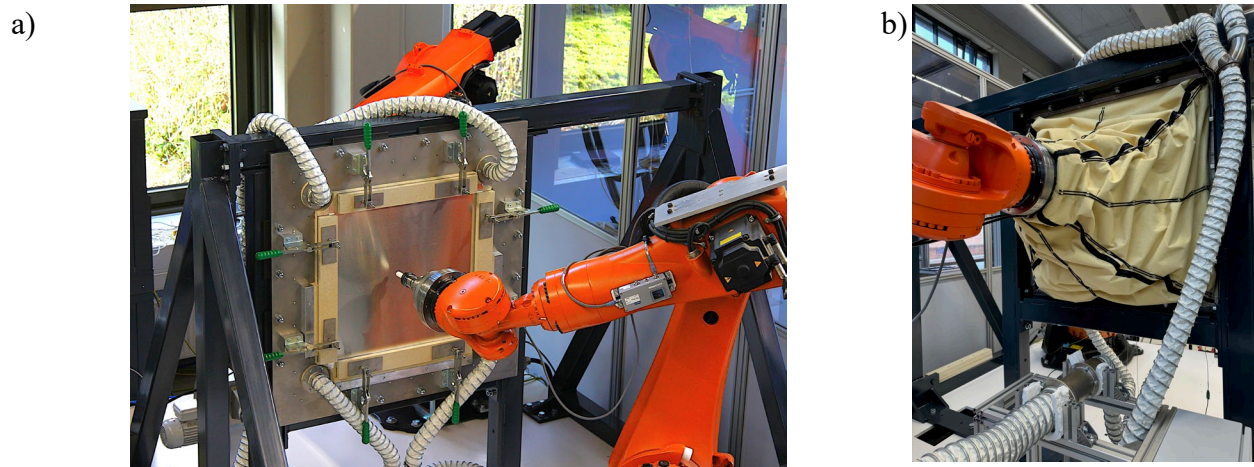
a) Final setup in the large sheet configuration; b) view from back
